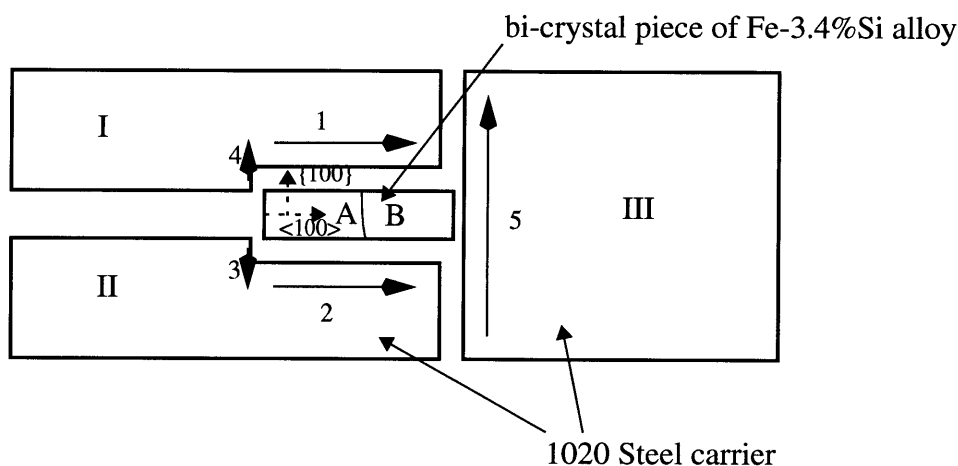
Schedule of assembly by EB welding of bi-crystal slabs into 1020 steel carrier blocks to form DCB specimens.
